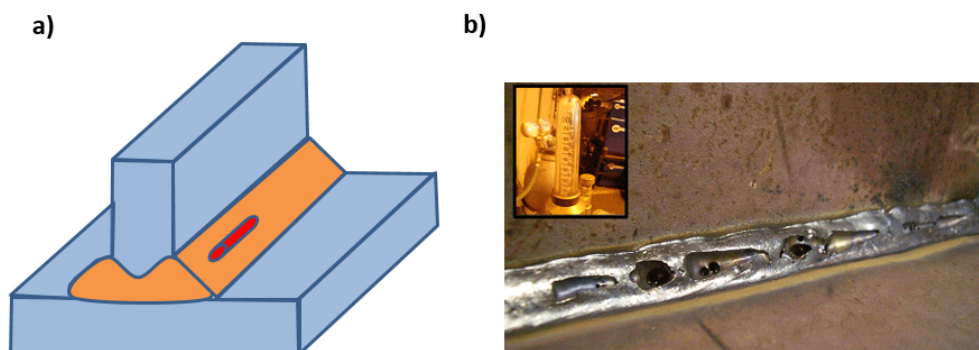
a) Representation of a wormhole in a T-joint weld (shown in red); b) Real image showing wormholes [31].
